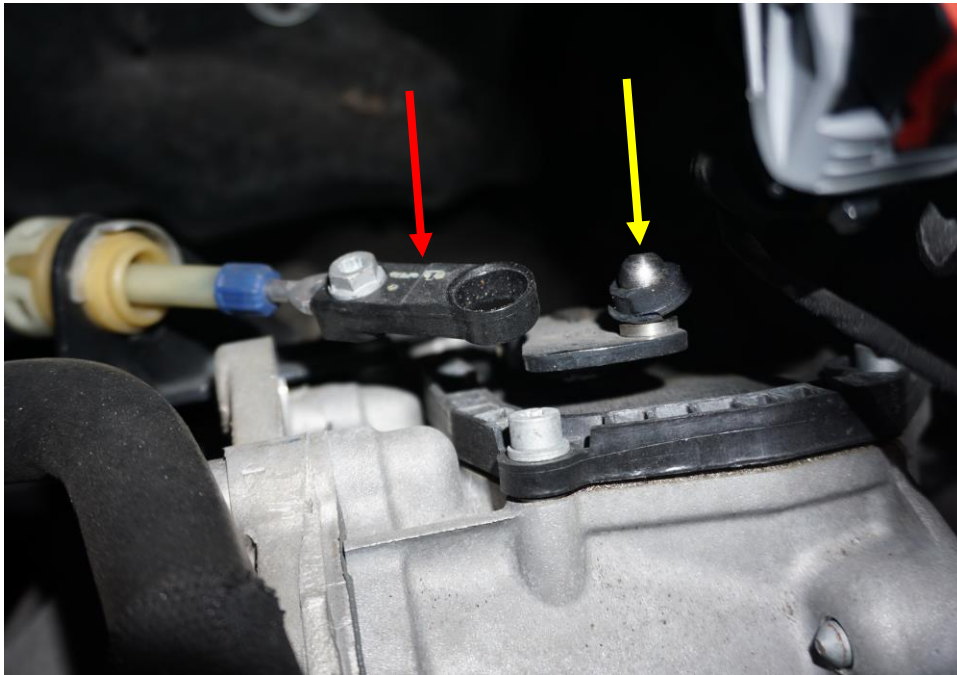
shows a close up view of the engine compartment of the Insured Vehicle at the time of my inspection. The gear shifting cable connector that was dislodged from the gearbox of the Insured Vehicle, was fitted at the bottom right side in the engine compartment of the Insured Vehicle. The location of the dislodged gear shifting cable connector is indicated by the red arrow and the gearbox connecting ball is indicated by the yellow arrow.
